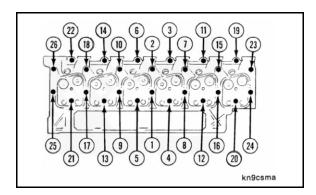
REMOVAL ORDER OF CAPSCREWS
